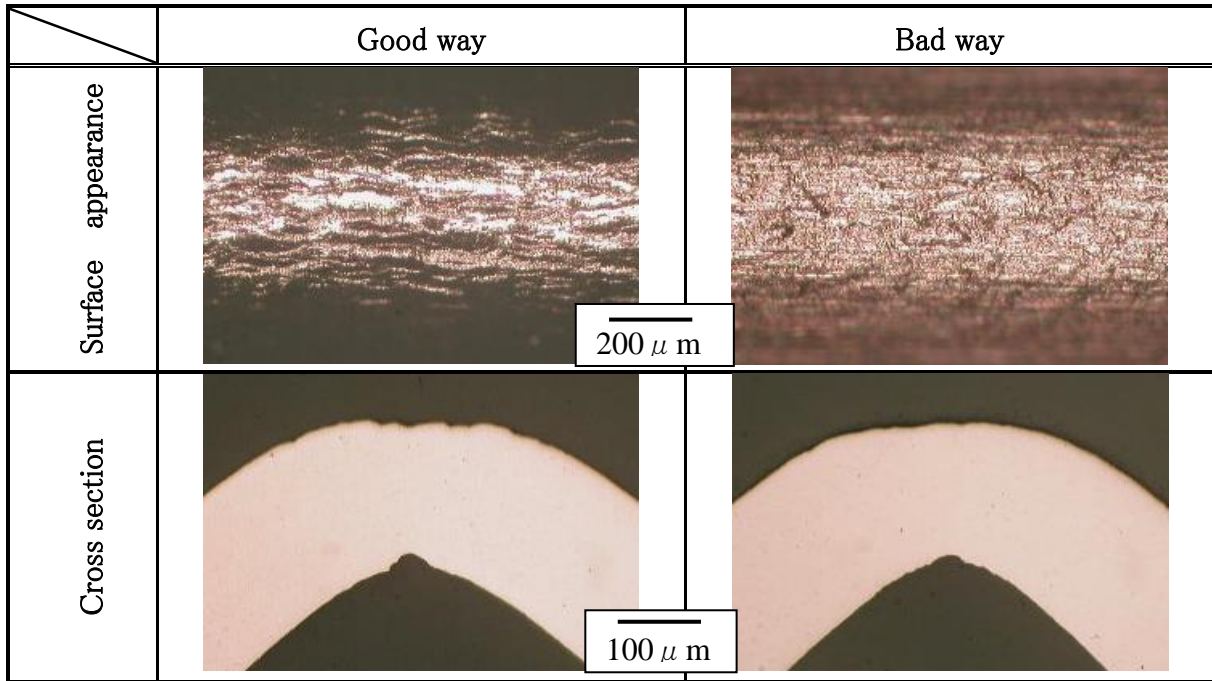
Surface appearances and cross sections of 90° W-shaped bending test specimens.
